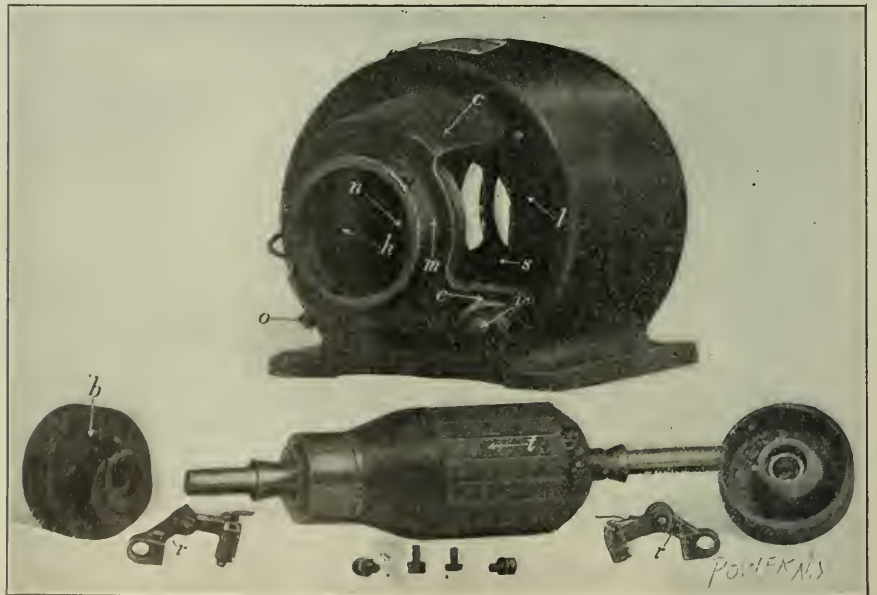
PARTS OF THE BIPOLAR GENERATOR SHOWN IN FIG. 290
